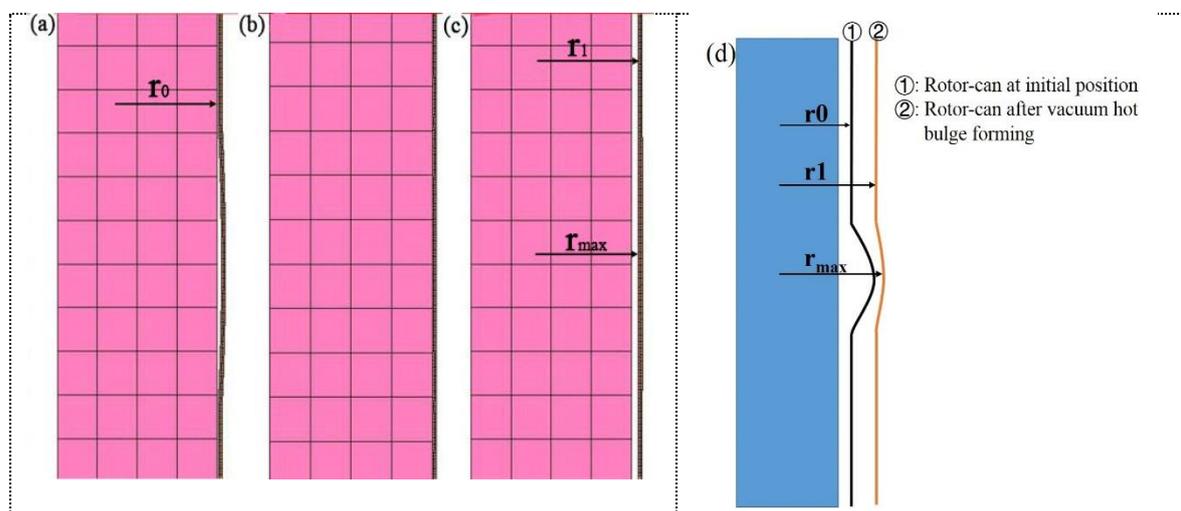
Evolution of shape of rotor-can and die. (a): initial position (b): holding stage (c): after vacuum hot bulge forming process (d): schematic illustration of vacuum hot bulge forming process
